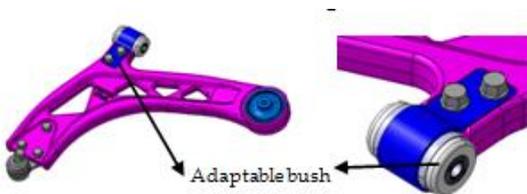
Final design of aluminium cast FLCA with adaptable bush
